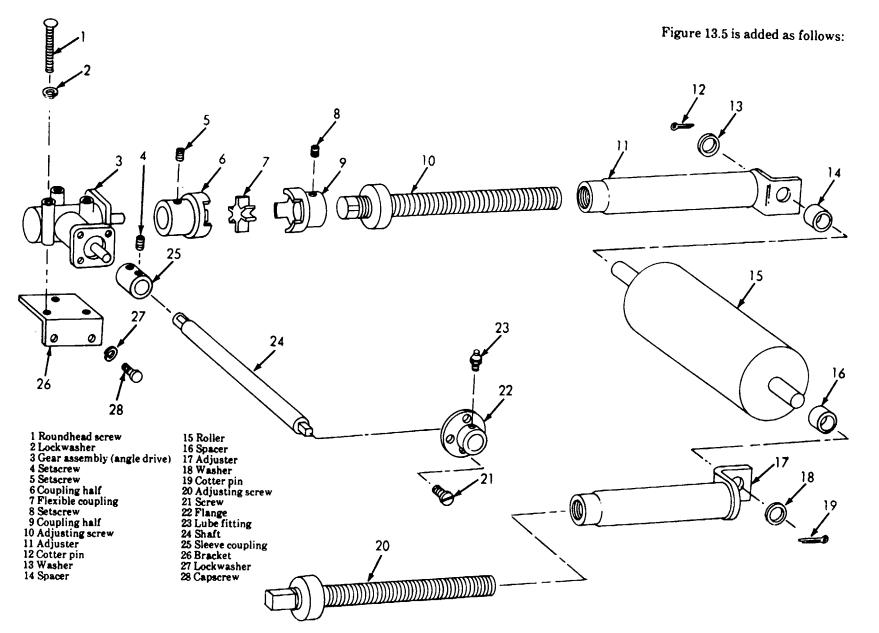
Pressure board belt adjustment roller and shaft (model 534-68). ME 7360-201-35/13.5 C3
